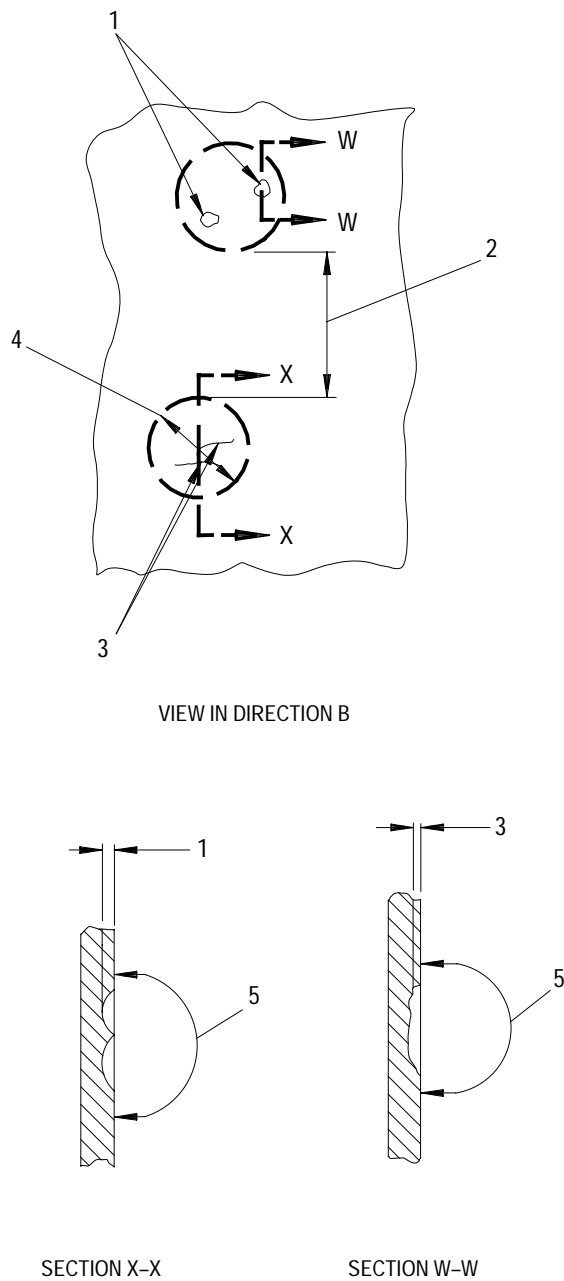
Front Compressor Drum Rotor Disk Assembly - Blend Repair (Sheet 1 of 3)
